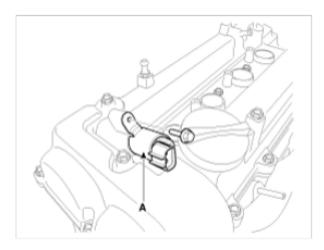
Identifying Exhaust Oil Control Valve Courtesy of HYUNDAI MOTOR AMERICA
